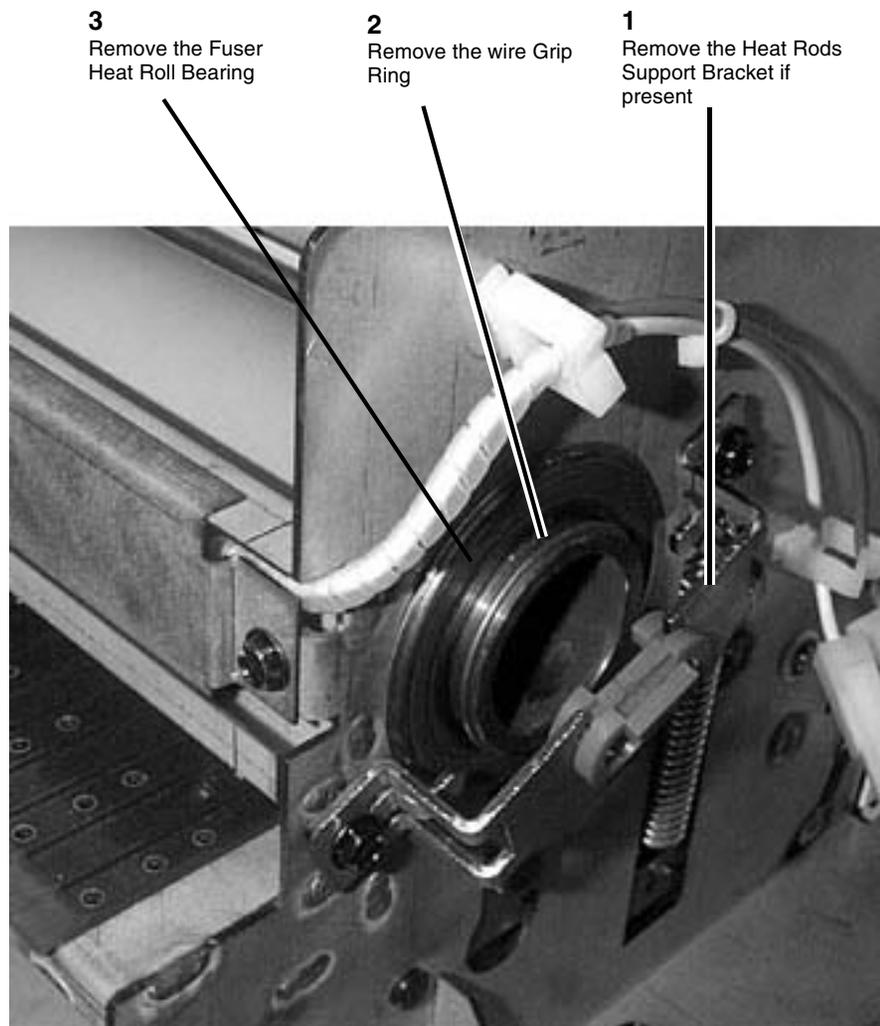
Removing the Left Side Fuser Heat Roll Bearing
